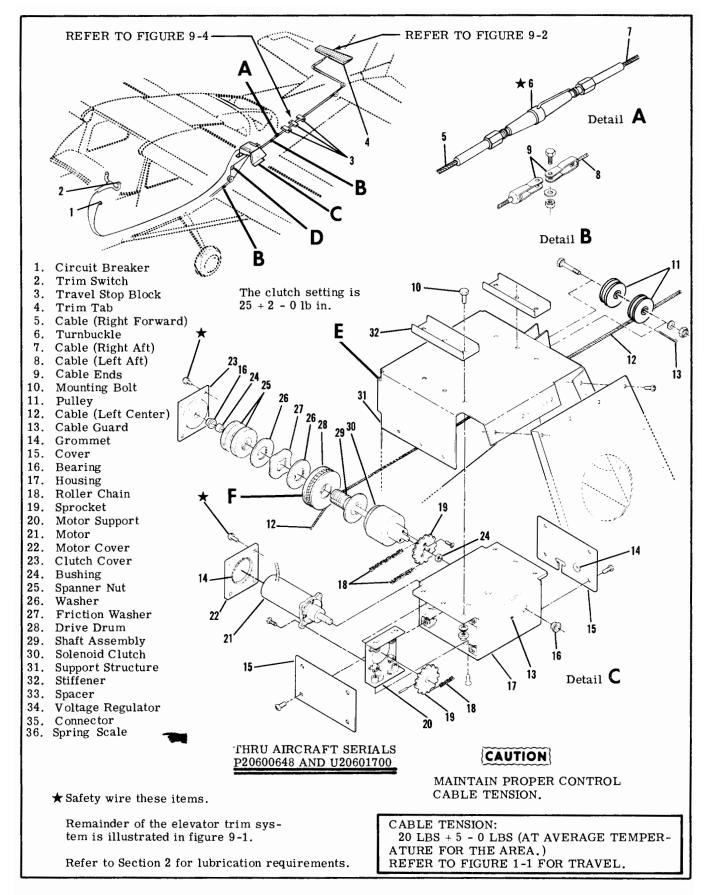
Electric Elevator Trim System thru P20600648 & U20601700 (Sheet 1 of 2)
